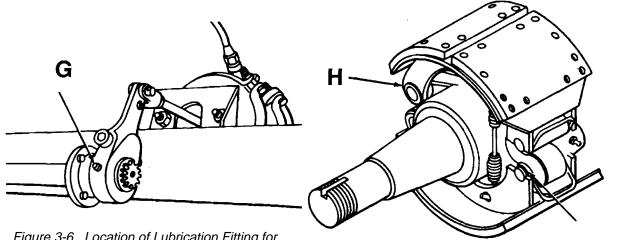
Location of Lubrication Fitting for slack Adjuster
